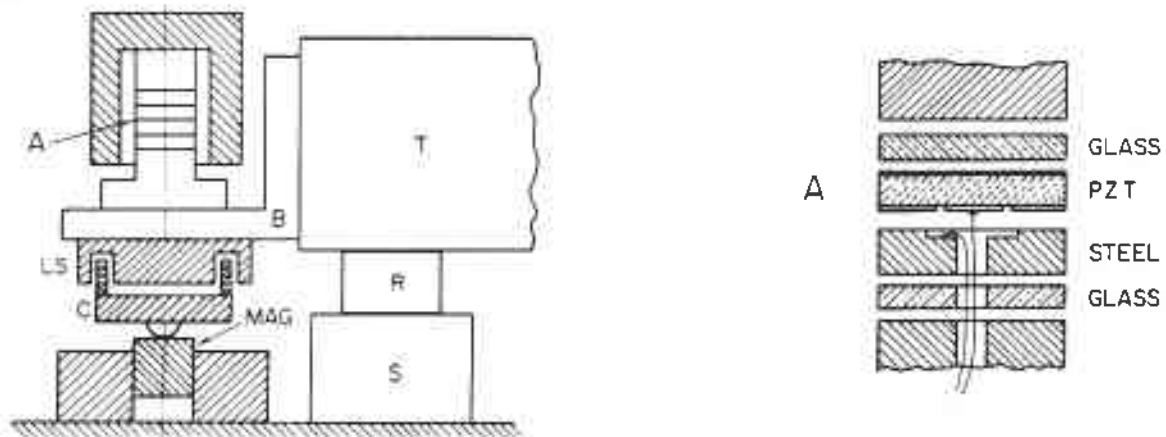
(a) Detailed construction of antivibration element and (b) exploded view of thermally compensated accelerometer.
